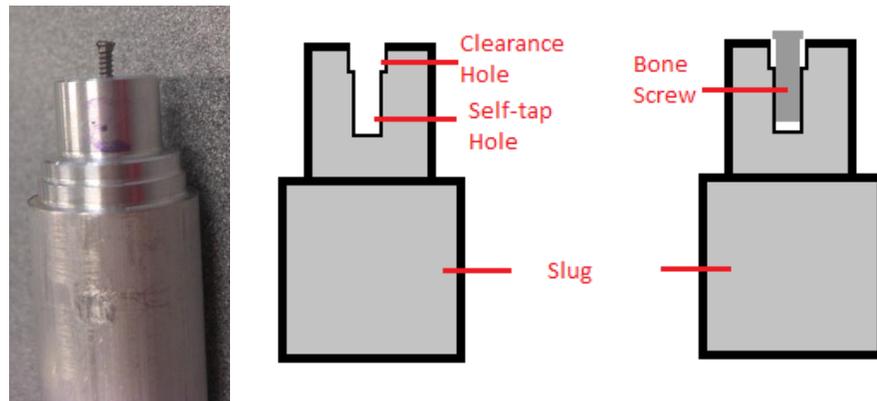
Aluminum slug loosely holding a bone screw (left), and schematics showing the hole setup and final position of the screw in the slug (right).
